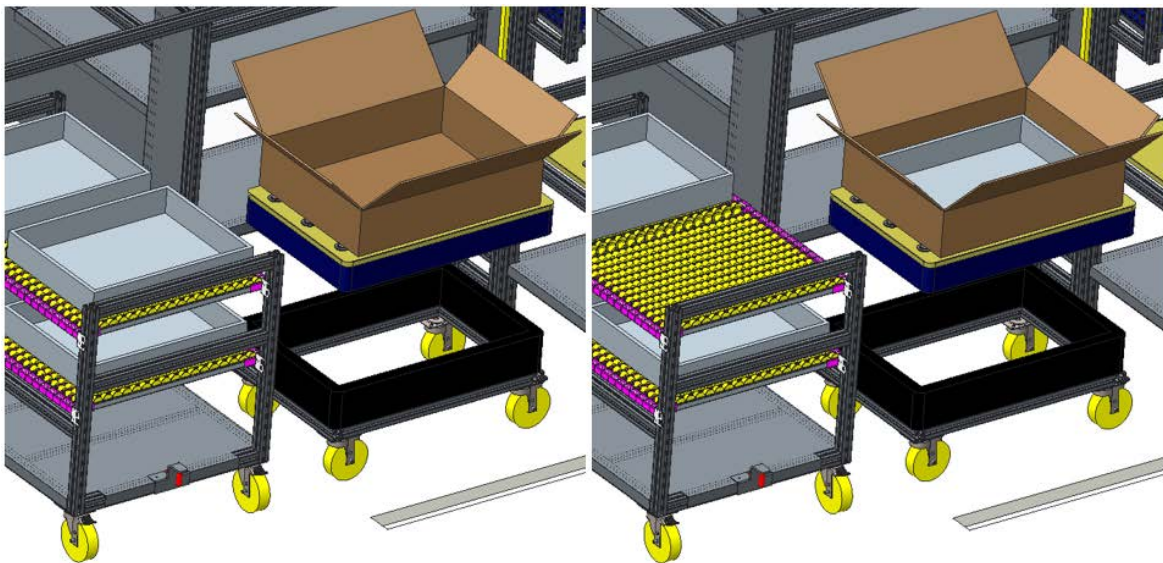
Placing bottom part of the Cabinet inside the packaging box
